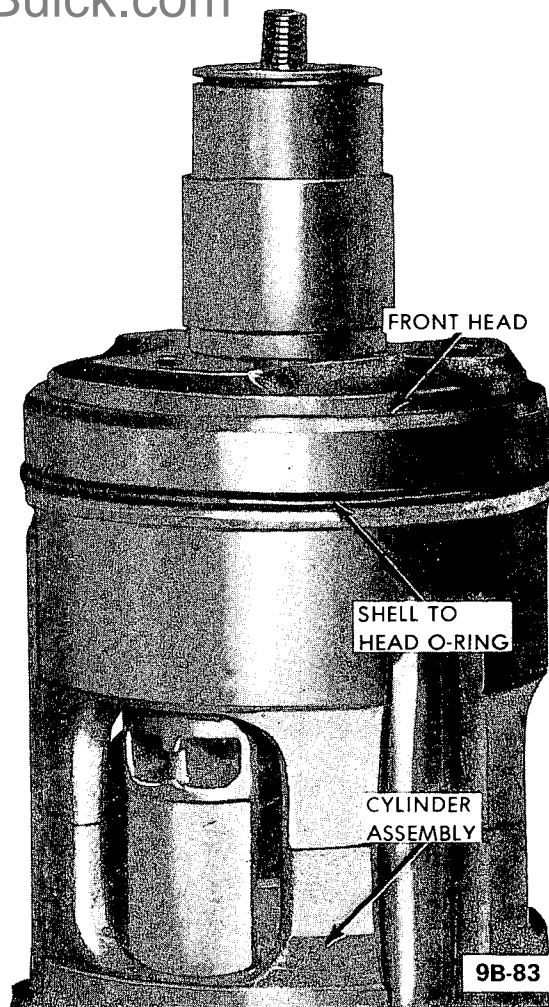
B-110 Shell to Front Head O Ring Installation - 6 Cylinder Compressor
